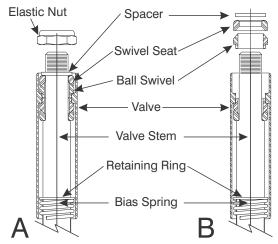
Remove Upper Ball Swivel and Seat, and Valve from Valve Stem.
